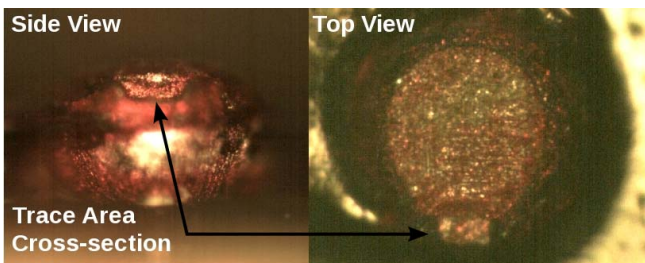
Trace cracked away from solder joint (left) and the same solder joint with pad dyed (view of component surface)
